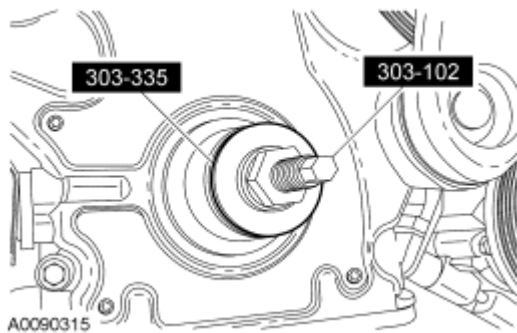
Installing Crankshaft Seal Using Special Tools (303-335 And 303-102)
